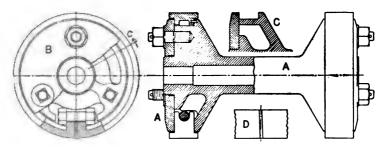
Valve with Adjustable Face-ring, Detail from Fig. 260. Scale 1 to 6.
